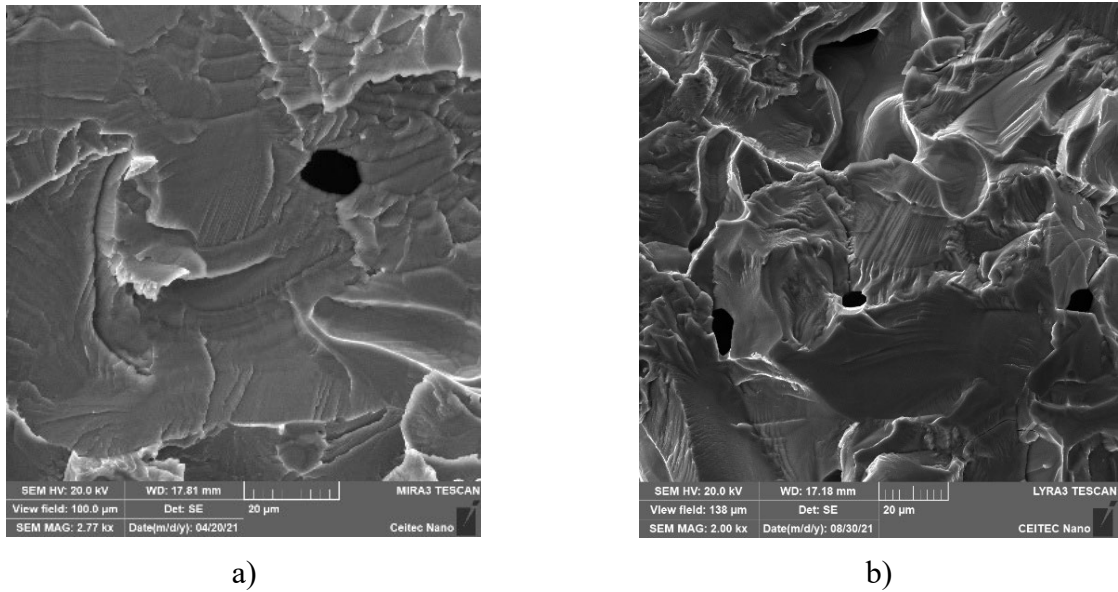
The typical fracture surface morphology of a) compound filaments and b) porous filaments. Note the larger and flatter facets on the compound fracture surface and pores on both fracture surfaces.
